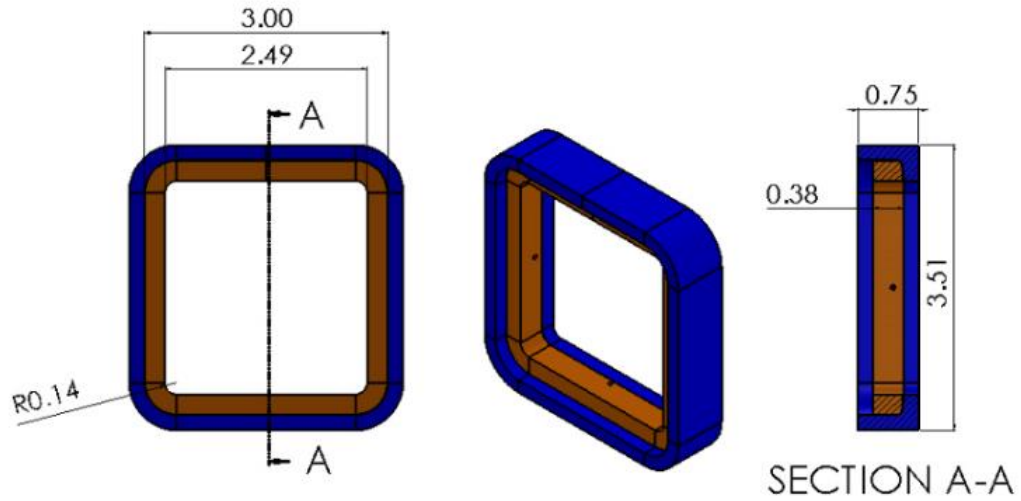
Mounting fixture for use with Kevlar® impedance tube test specimen (all dimensions shown are in inches)
